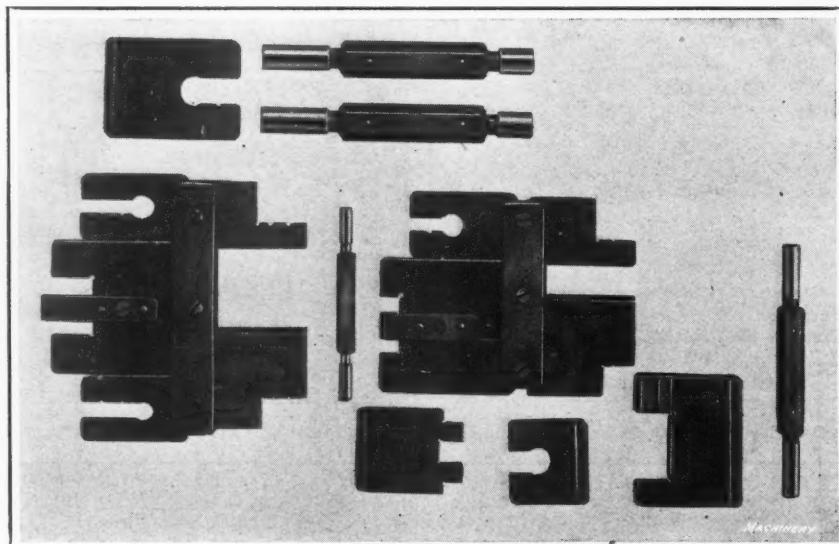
Complete Set of Working, Inspection, and Reference Gages in which are shown Working and Inspection Plug Gages with Ends of Unequal Length and Reference Plug Gages with Ends of Equal Length
